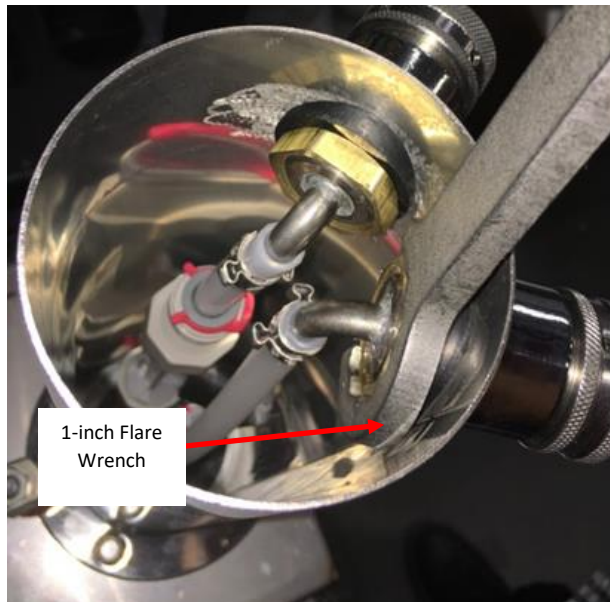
Flare wrench used to remove Elbow Shank Lock Nut.
